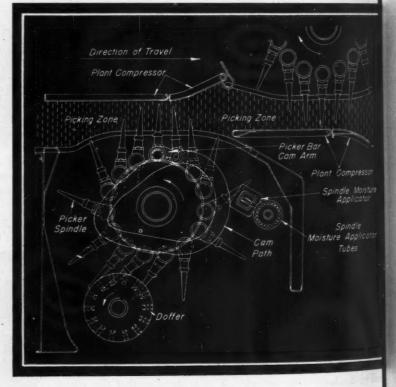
Right—Diagrammatic top view of picker mechanism. Spindles are rotated by drive from large center gear and positioned by cam-actuated bars
